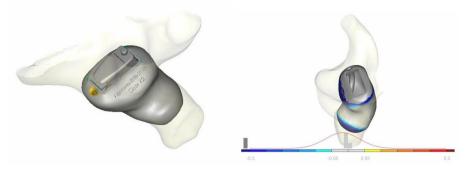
Ear shells with faceplate design-CADCAM method ear shell with faceplate part
